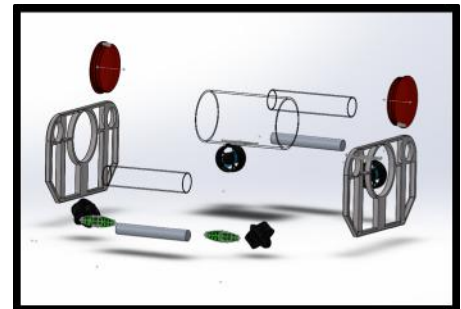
Exploded view of basic components of *Seawolf VII* including frame, thrusters, end caps, and electronic housing tubes
